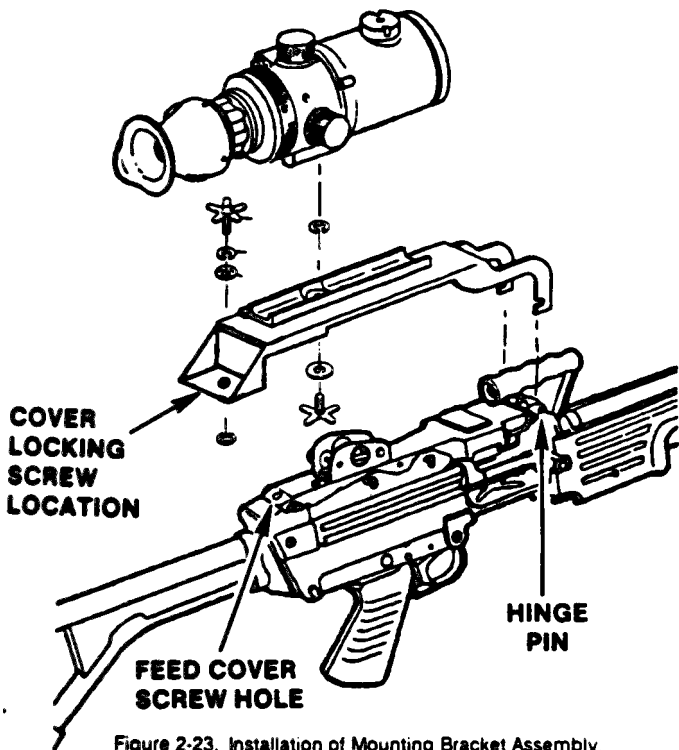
Installation of Mounting Bracket Assembly, M249, Squad Automatic Weapon.
